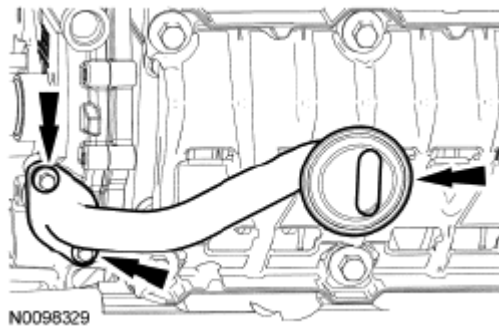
Locating Oil Pump Screen, Pickup Tube & Bolts
